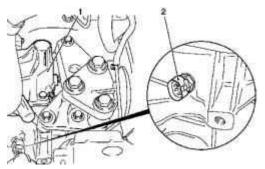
Removing the gearbox: 1 - cover 2 - switch reversing lamps
